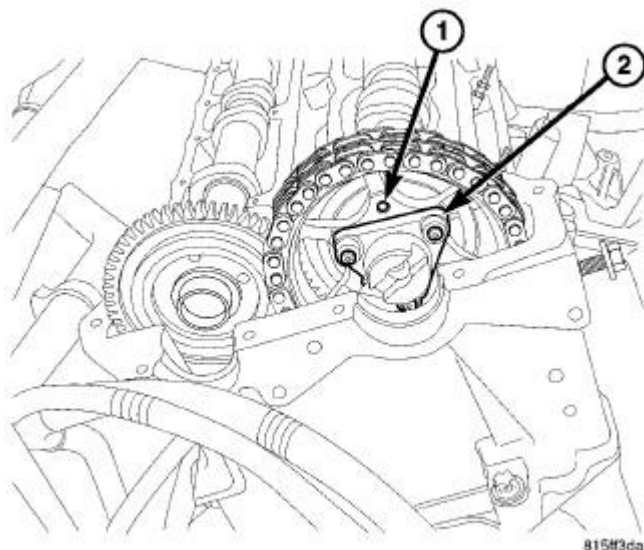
RIGHT INTAKE CAMSHAFT DRIVE GEAR
